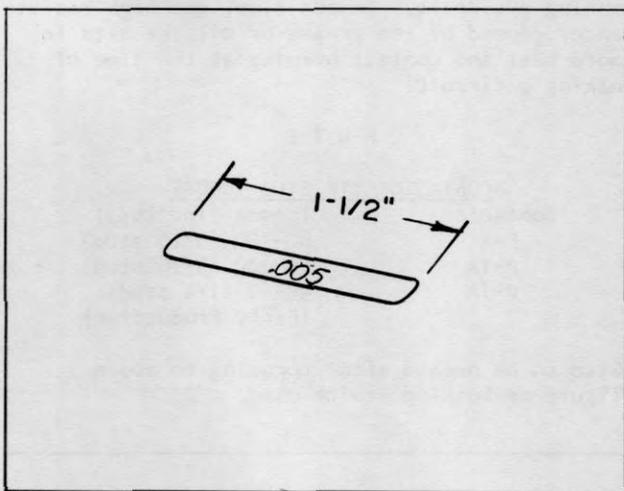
Typical Brass or Steel Shim Stock .005" Thick.
